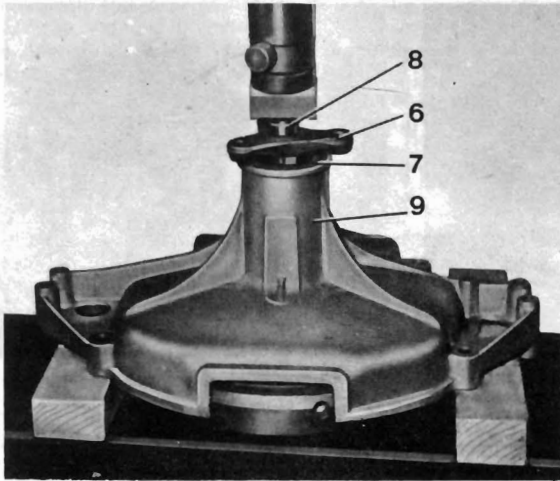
Pressing shaft from clutch housing (Sec 3)
